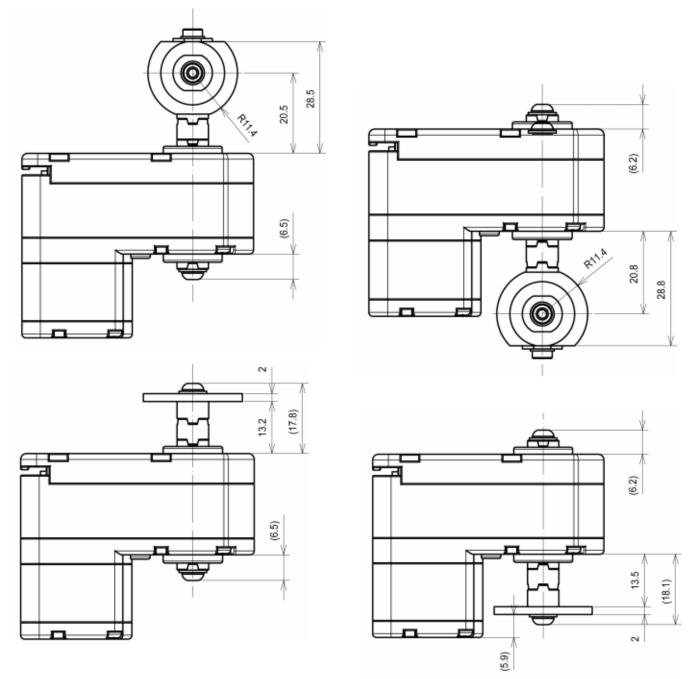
Dimensions of RS601CR and Servo Horn/Joint Ball with Drive Spacer
